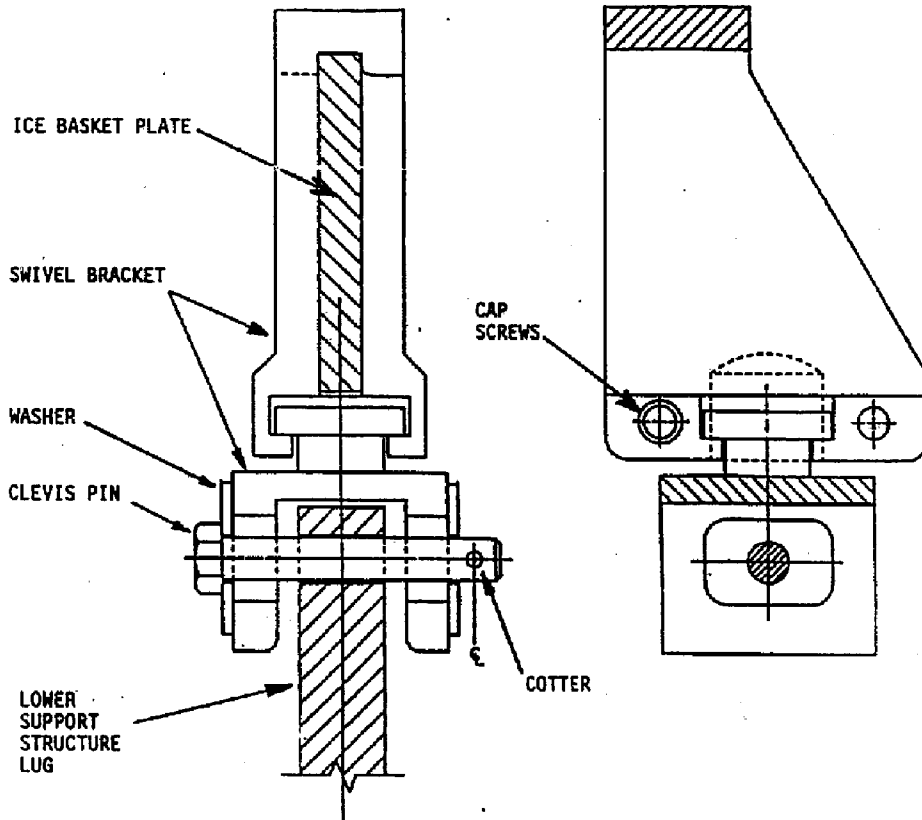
Block Ice Minimum Restriction Basket Assembly
